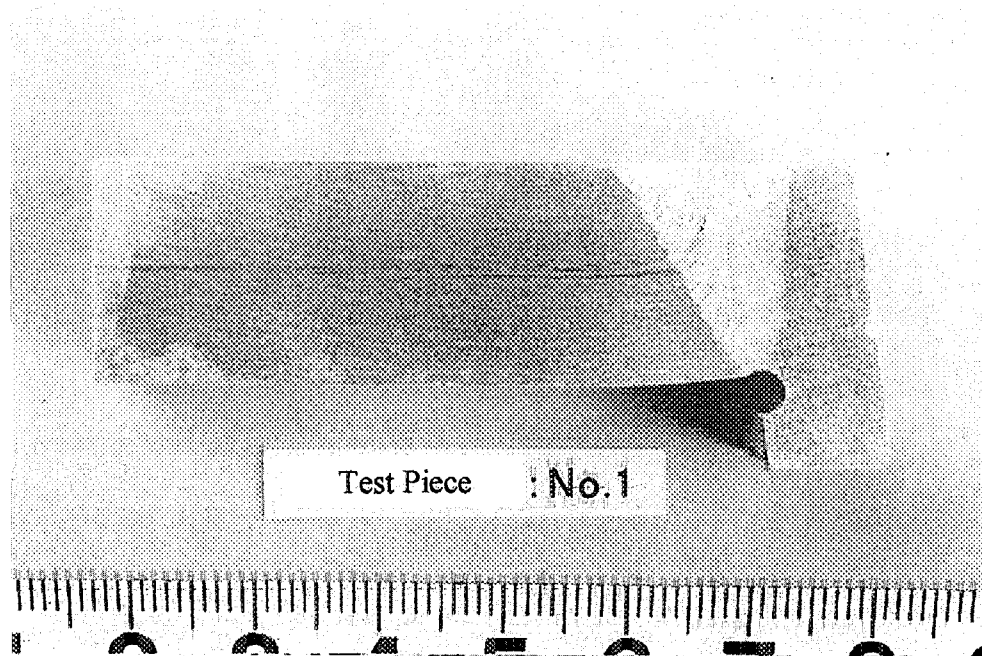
Macroscopic photograph of the test piece showing TIG welding bead from TP #1
